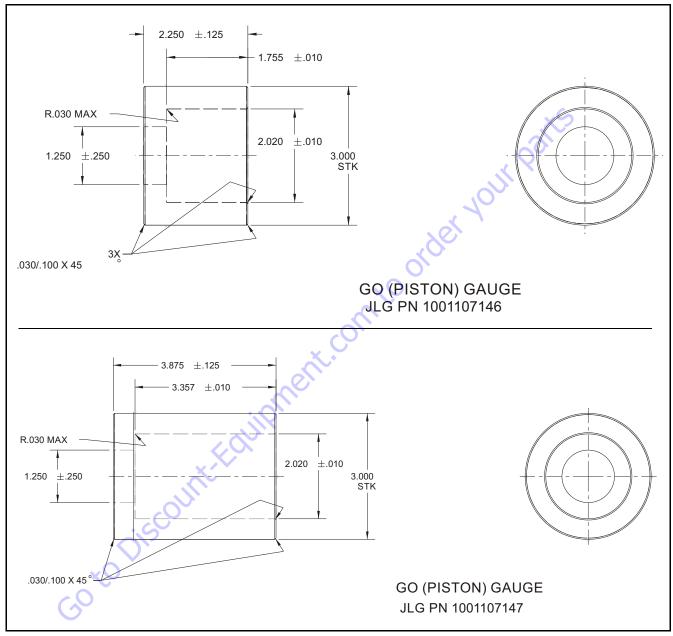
Special Tools for Tower Tele Cylinder - Sheet 2 of 2
